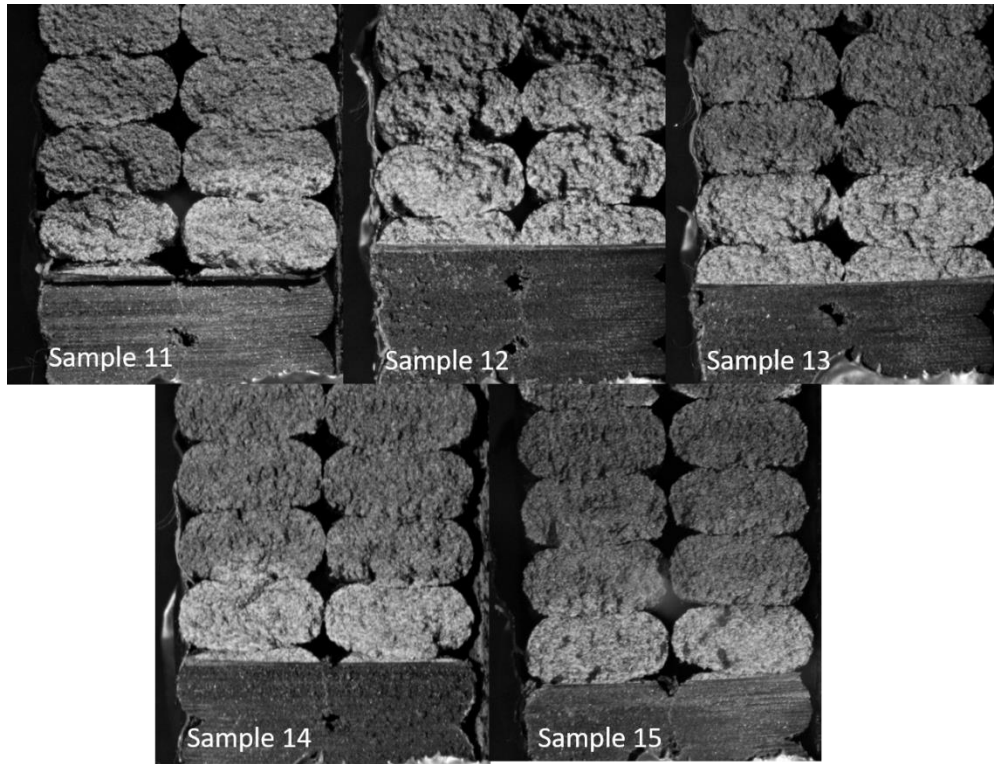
Fracture surface of the SCB 33.02mm radius specimens printed at 220°C. Due to cutting location, the notch ended at various points within the printed beads
